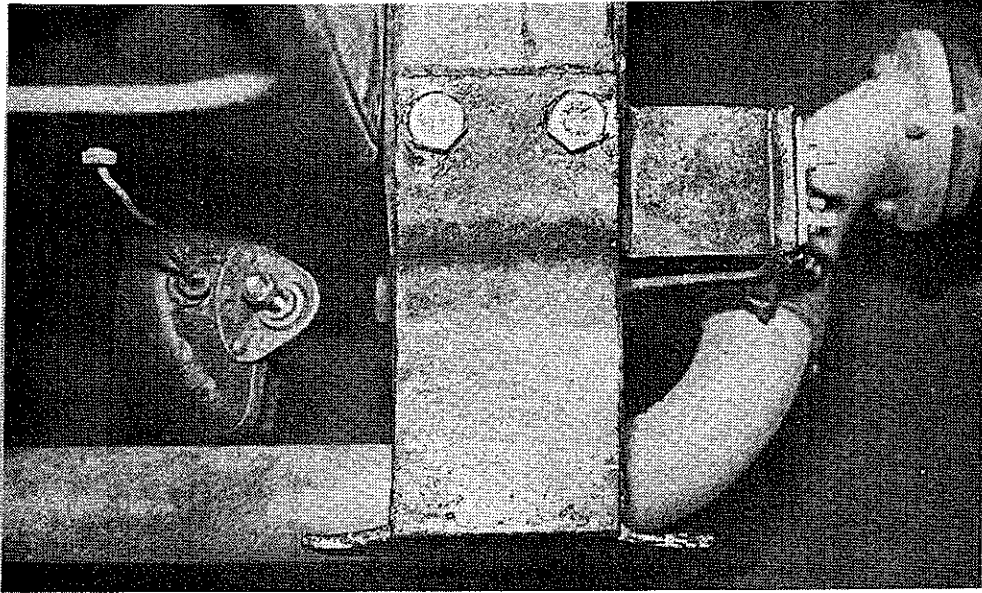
BOLTS FITTED TO RE-DRILLED HOLES IN END OF
